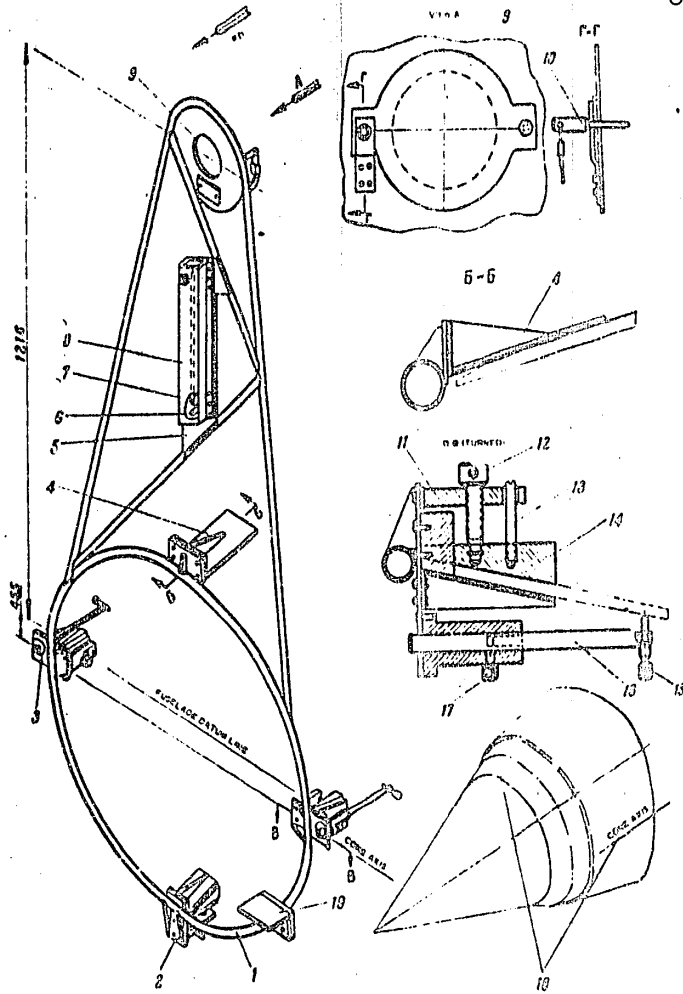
DEVICE FOR "TYING IN" TESTING SHIELD TO AIRCRAFT (TO BE MOUNTED ON FUSELAGE RIGID EDGE)
